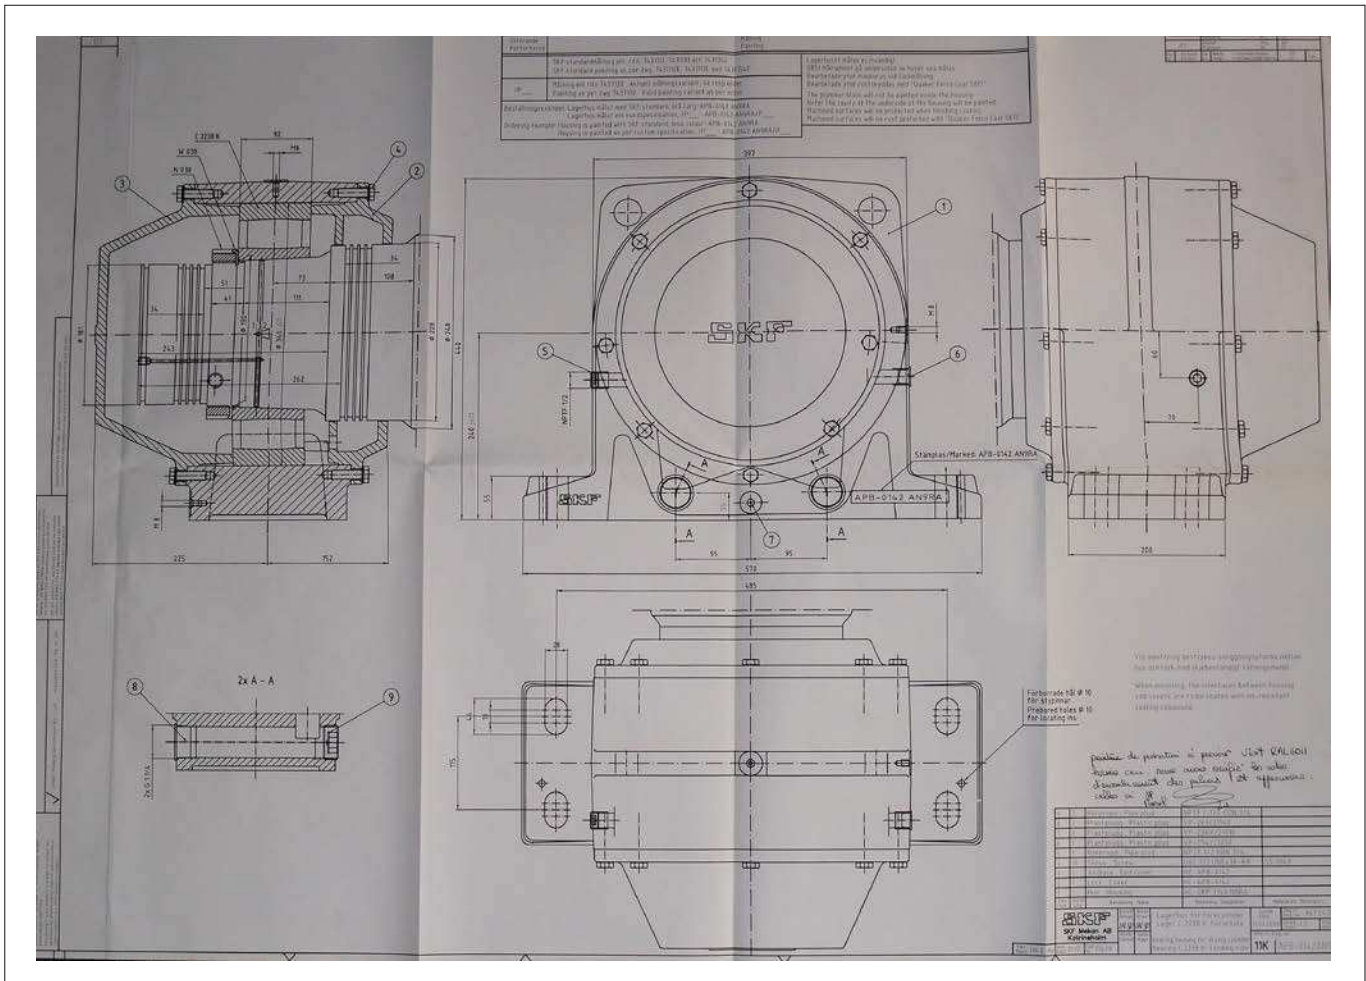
SKF standard housing body with custom made covers to fit existing journal.
